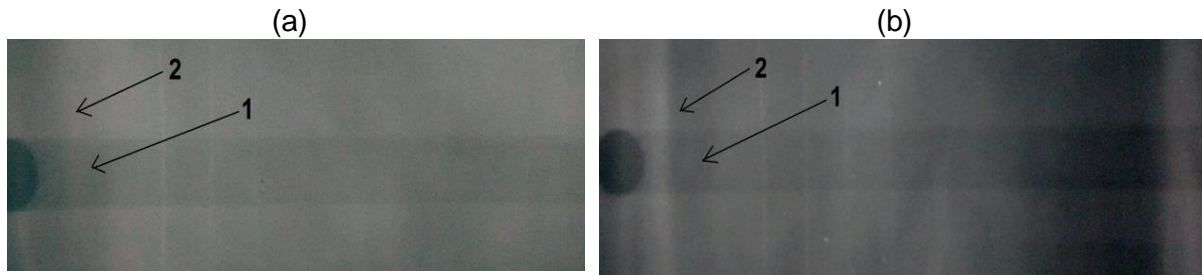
Radiography of a) weld 8 b) weld 16
